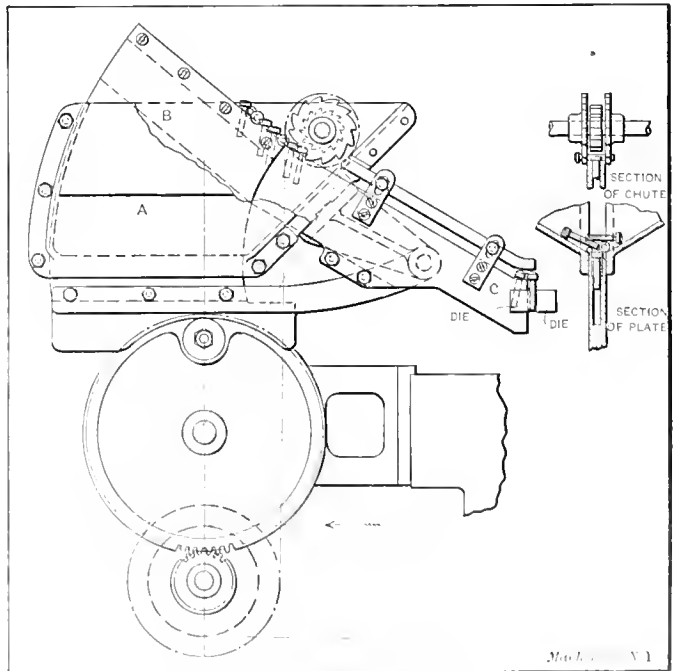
Automatic Feeding or Hopper Mechanism for Screw Blanks in Thread Rolling Machines
